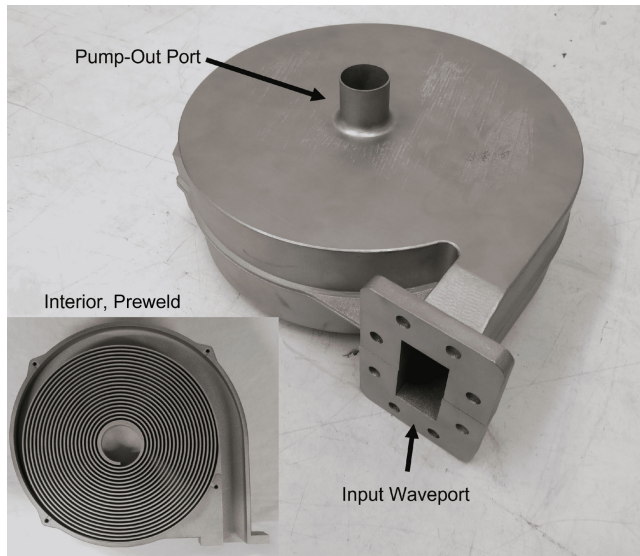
Additively manufactured spiral rf load, with the inner structure shown in the inset [206].
